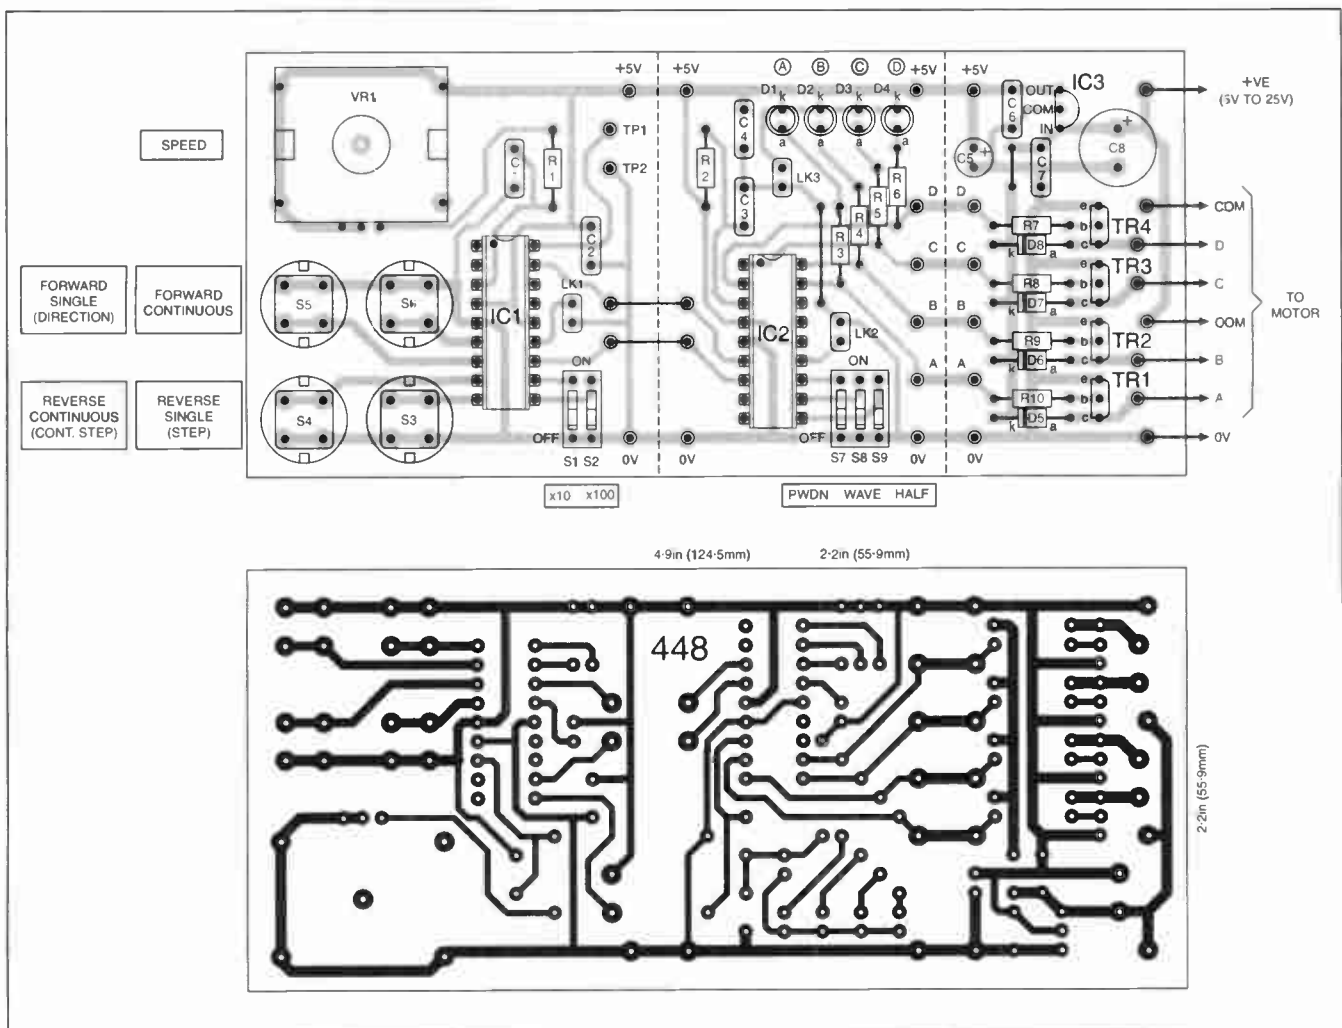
PIC QuickStep printed circuit board component layout and full-size copper foil master. Refer to Fig.1 for motor wiring.
